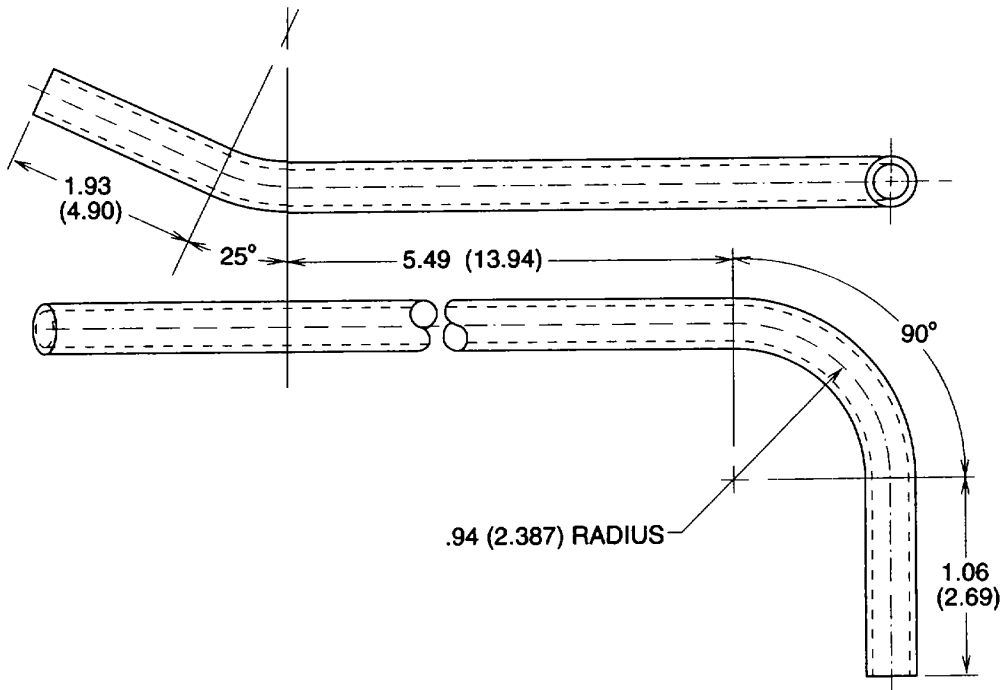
Tube Assembly, Outlet, Condenser Coil, Part Number 152K0171
